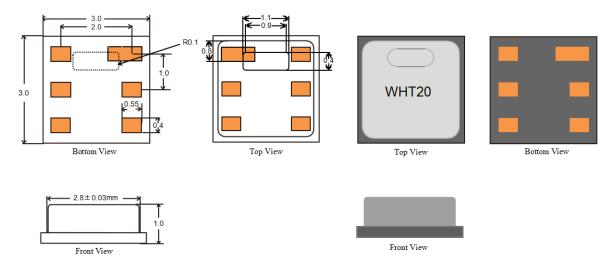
WHT20 sensor package diagram (unit: mm tolerance: ±0.1 mm)
